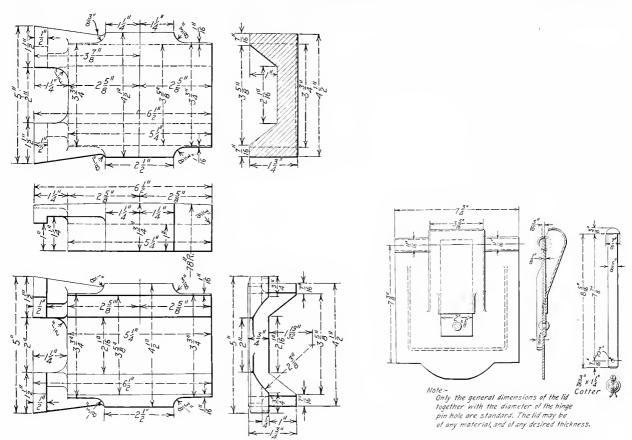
M. C. B. Standard Wedge and Journal Box Lid for 3¾ in. by 7 in. Journal. (M. C. B. Sheet 3.)
